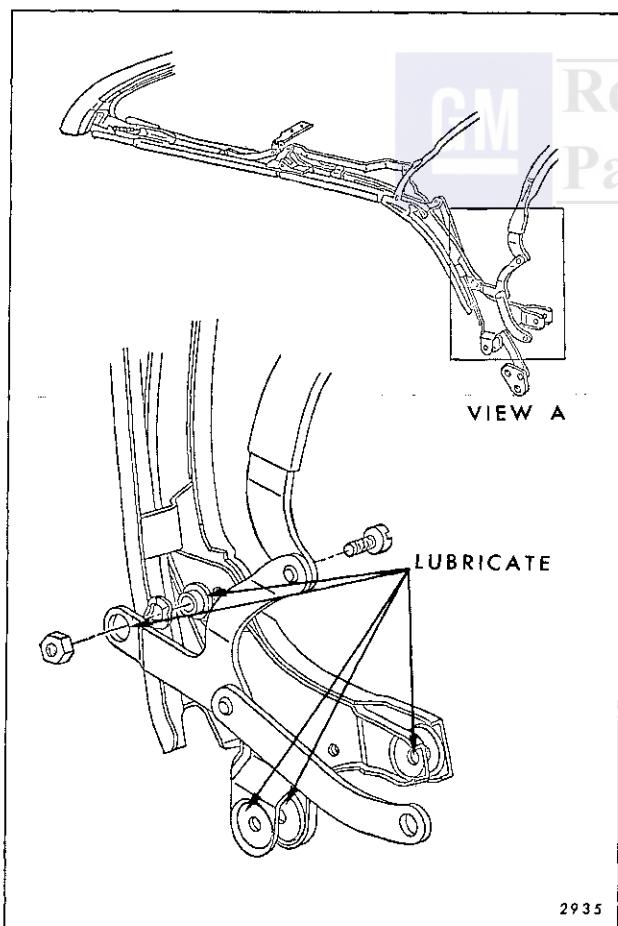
Convertible Top Hinge - "B" Body Styles
